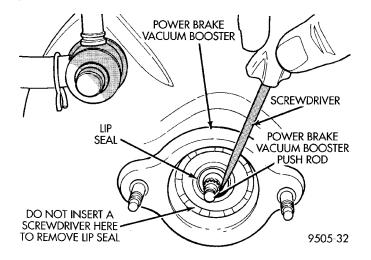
Vacuum Seal Removal From Power Brake Booster
